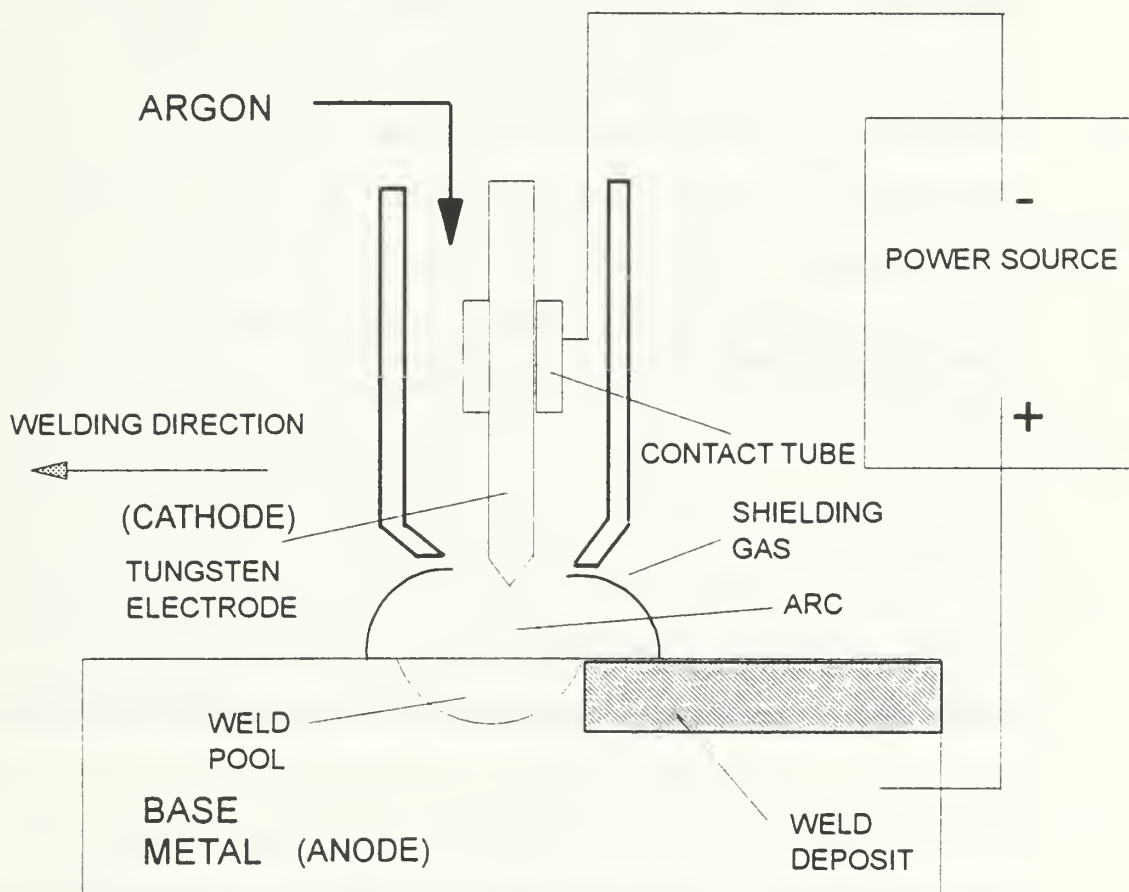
Sketch of the Gas Tungsten Arc Welding Process.
